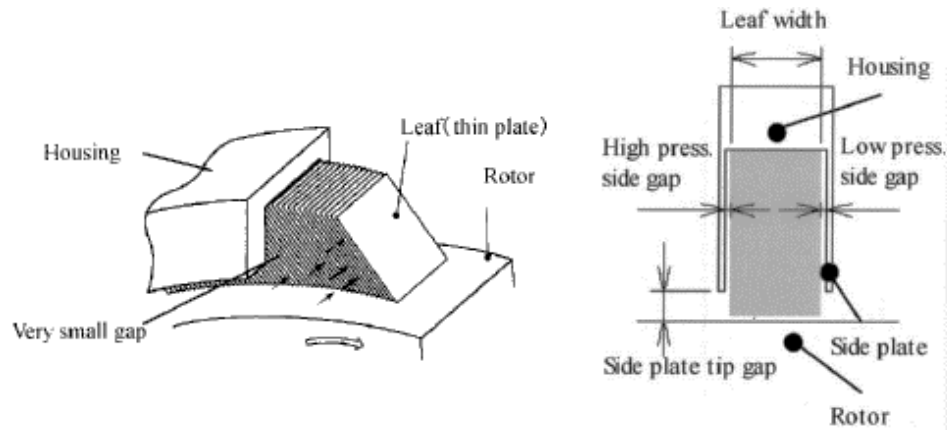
Assembly of the leaf seal investigated by Nakane *et al.* [2004].
